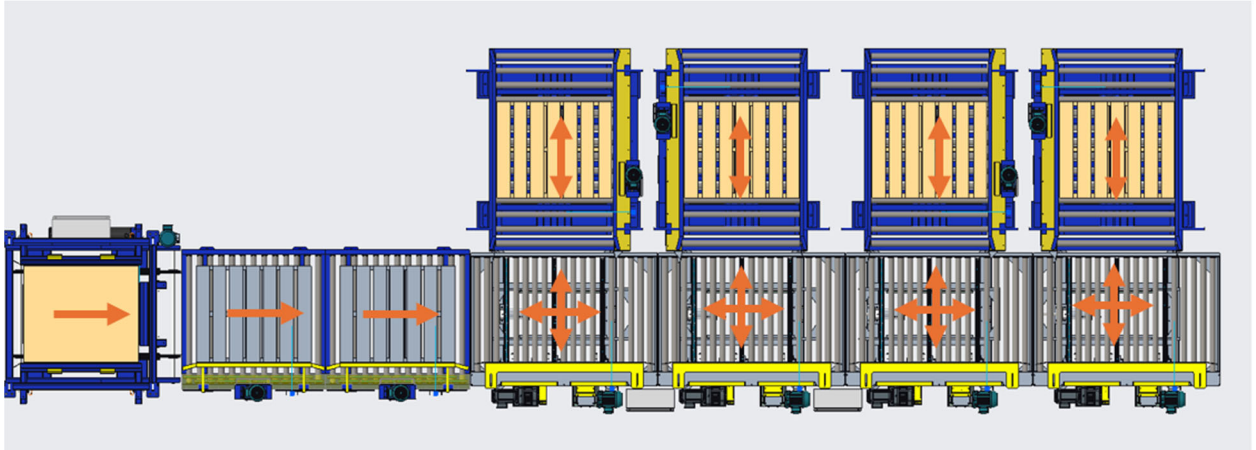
Box Filling System with Pallet Dispenser, Inlet CDLR Conveyors, four (4) PUCT Conveyors, and four (4) fill stations.
